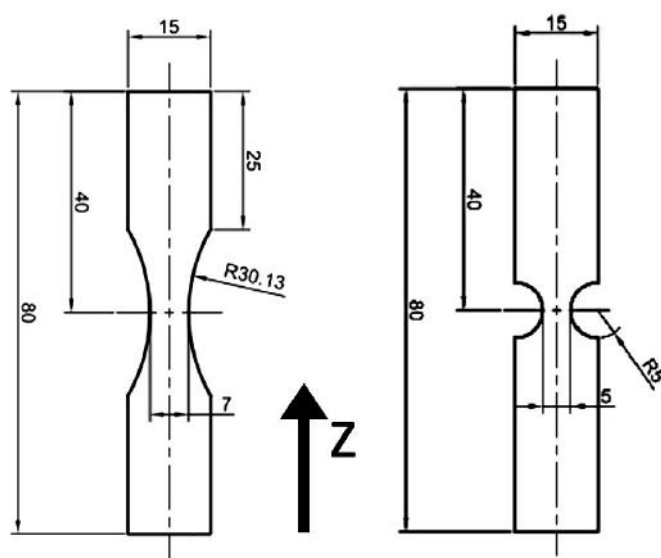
Geometries of smooth and circular notched specimens and built axis (Z) (dimensions in mm).
